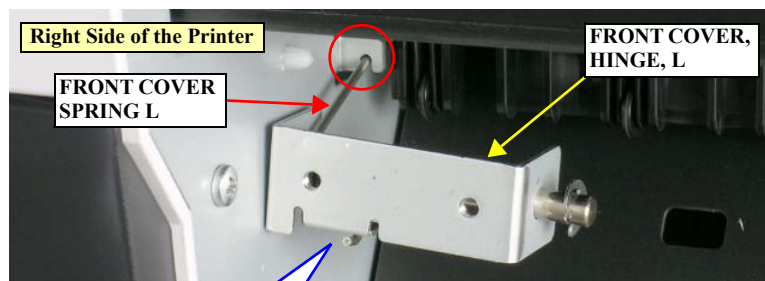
Checking the FRONT COVER, HINGE and FRONT COVER SPRING
